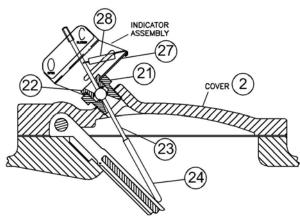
MECHANICAL INDICATOR ASSEMBLY
